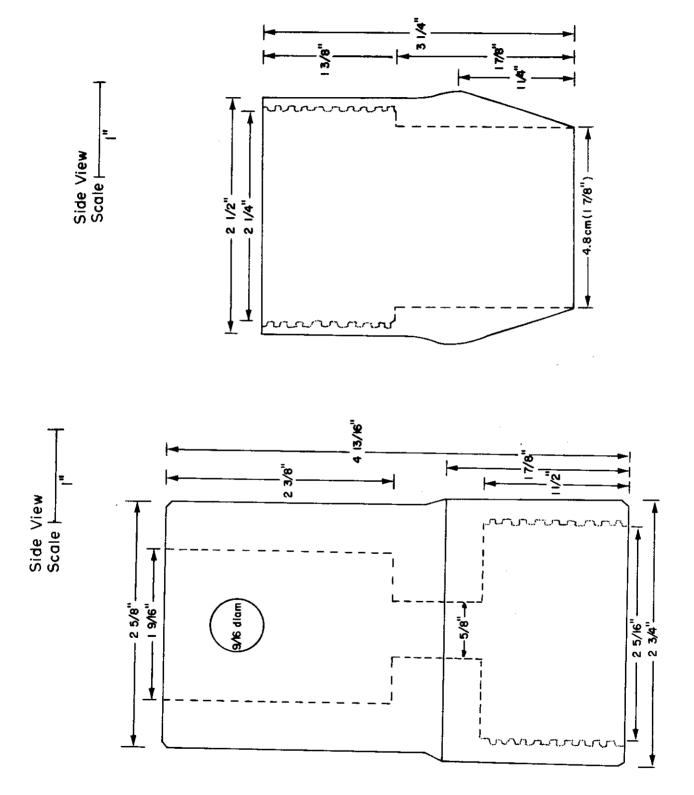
Adaptor cap and cutting head for split-barreled soil coring tube, side views.
